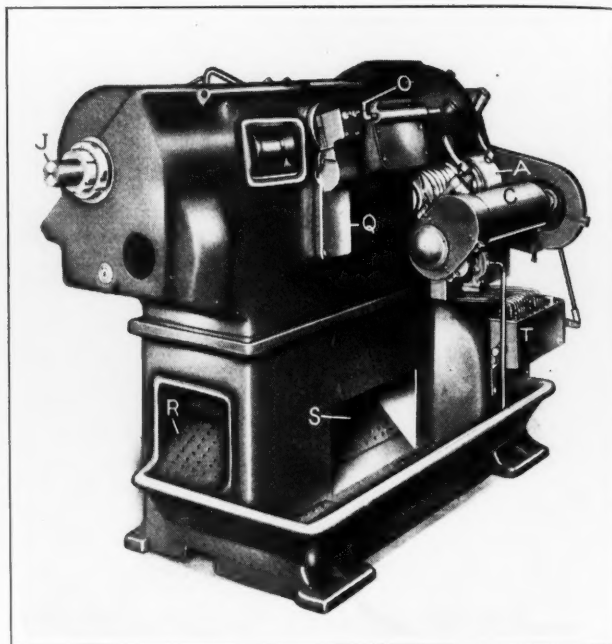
Rear View, illustrating the Separate Chutes for the Work and Chips
